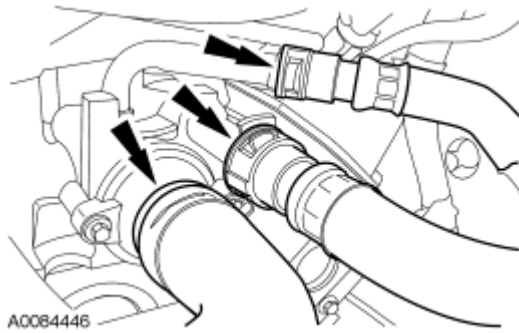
Locating Upper Radiator Hose & Heater Hoses
